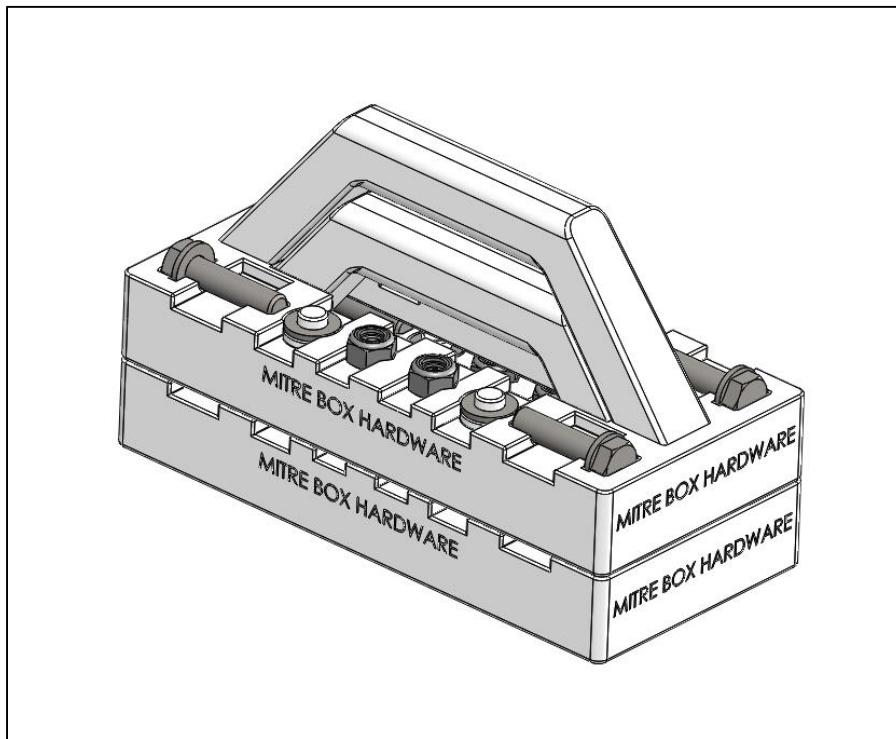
Fully assembled and stacked mitre box hardware fixture [69].
